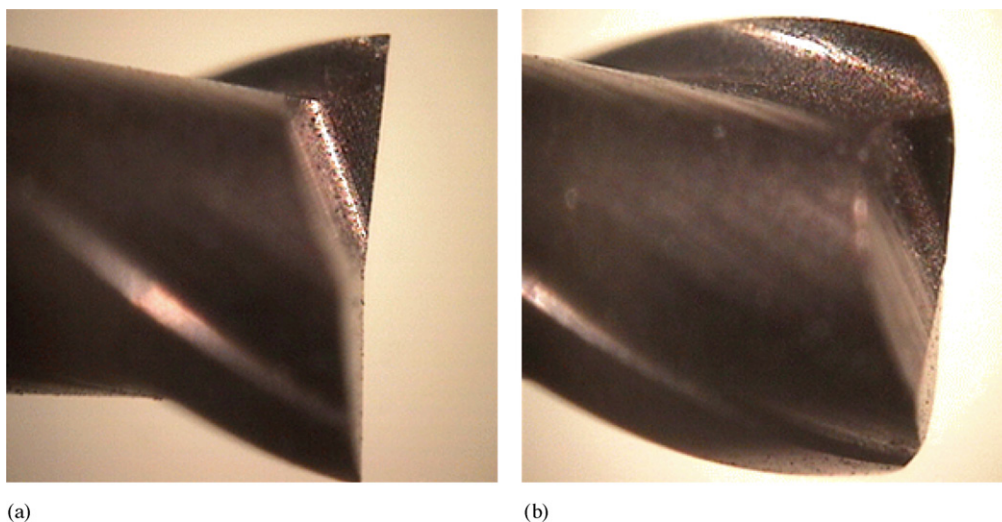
Tool wear by micro-machining of machinable ceramics (5 vol.% of h-BN): (a) before and (b) after.
